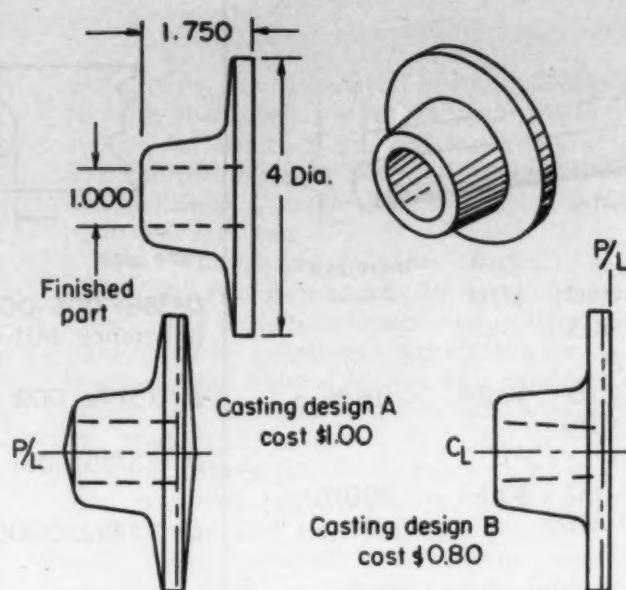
Additional cost for magnesium casting *A* is due to the need for a core to produce the hole. Since the finished hole requires machining, the design as at *B* with draft in the hole offers a saving
